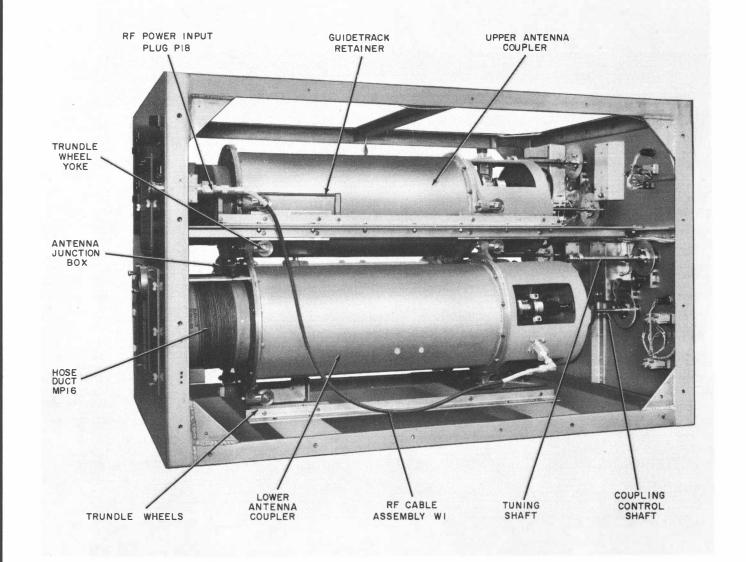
Electrical Equipment Cabinet CY-3409/FRA-49(V), Left Rear Oblique View
